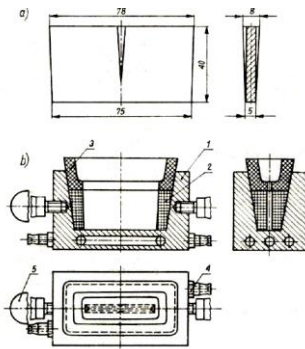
Casting of samples in a water-cooled metal mould [11]
